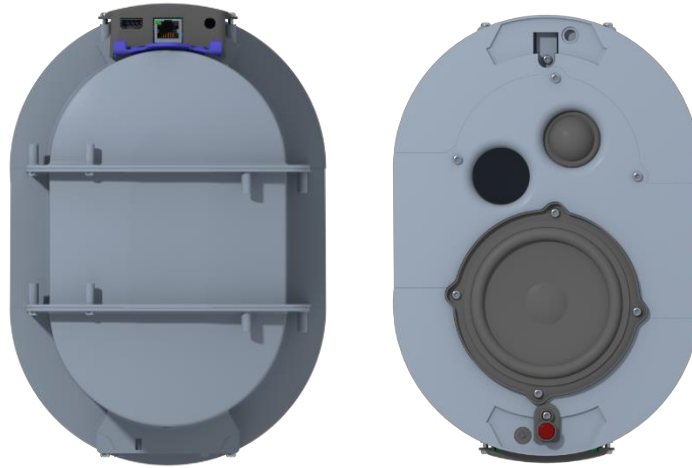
Redesign of screw towers for manufacturing purposes.
